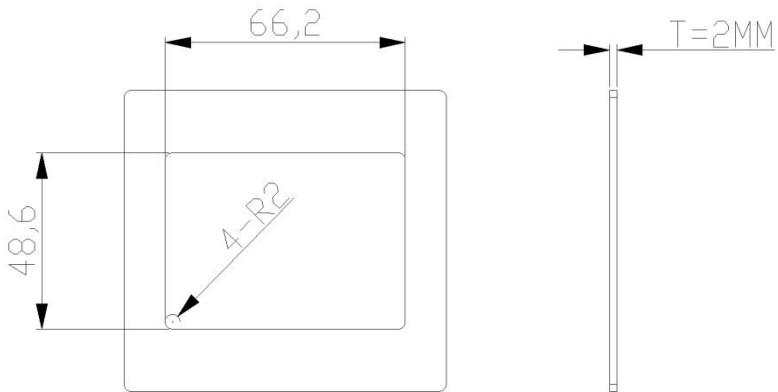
Dimensions of an external opening hole for a keypad of 22kW and below (unit: mm)
